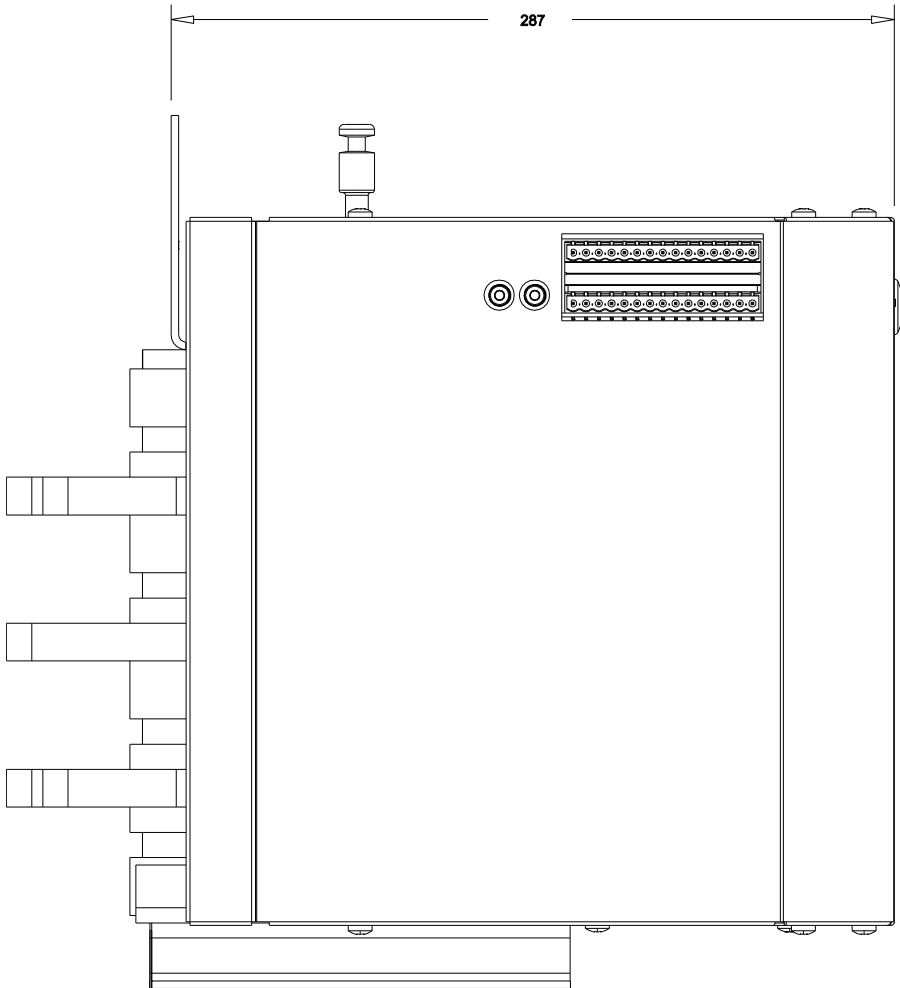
Device dimensions from left side. All dimensions in millimeters.
